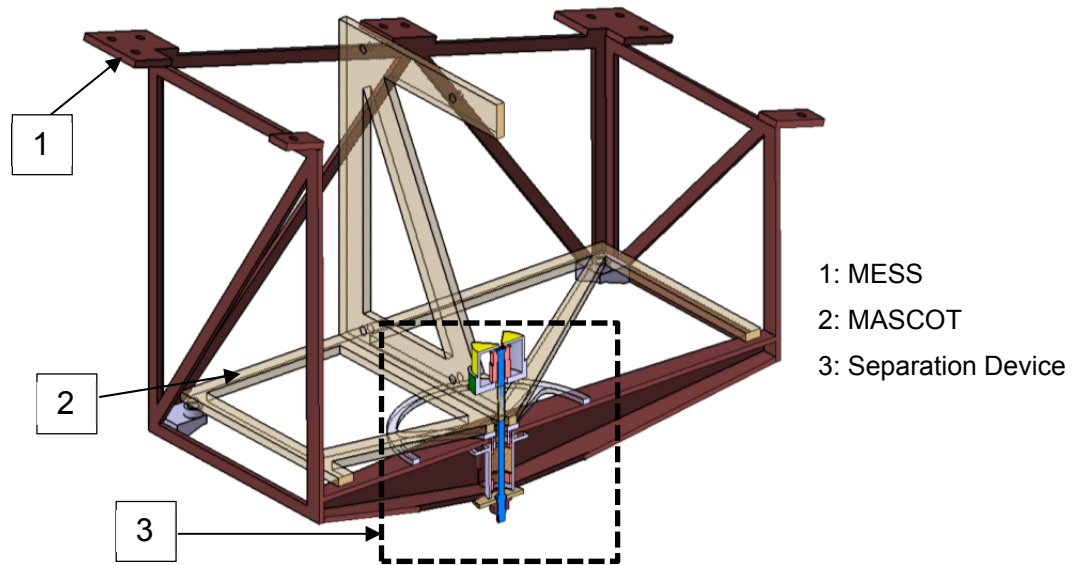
Cut-View of the Push-off Assembly (Ref. [1])
